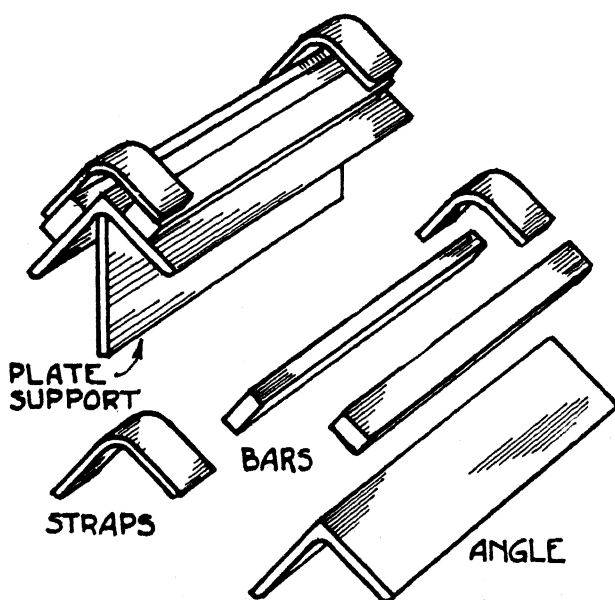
Suggestion for a jig to be used for fit-up in welding of thin sheets.
